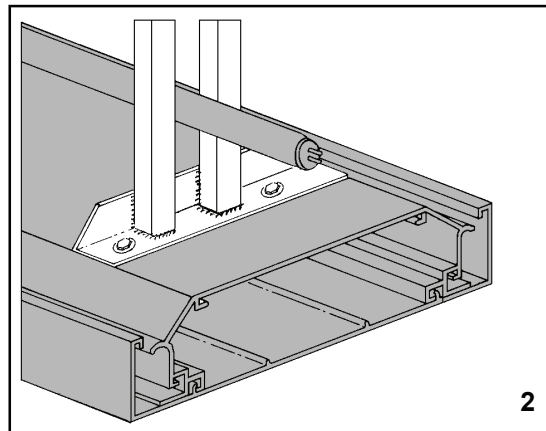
illustrates ABC Cad-Cam cut aluminum plate C-Iron brackets which are cut to precisely fit the Single Hinge Frame for single face signs. Aluminum struts can be welded to these brackets. Steel struts must be double bolted, as illustrated.
